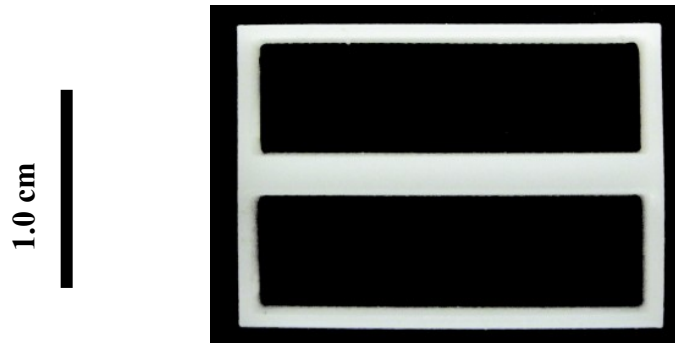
The final chassis after being cut from the white delrin in the laser cutter
